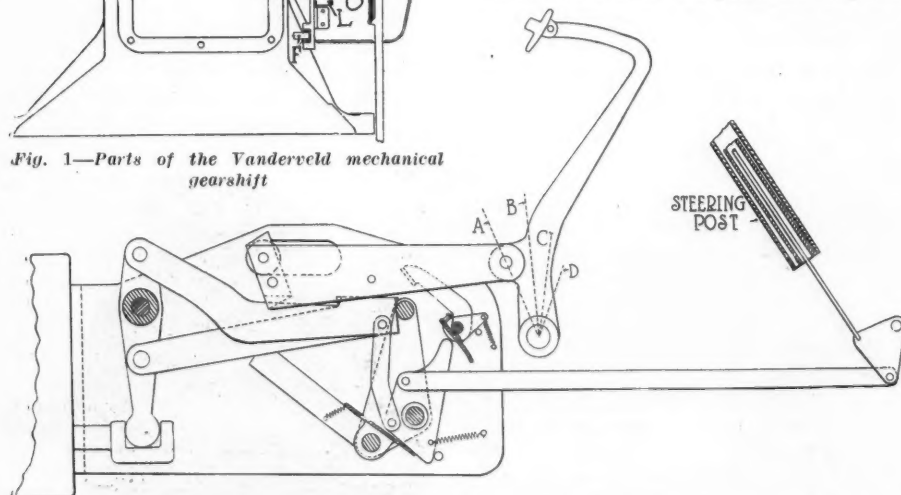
The four clutch positions in the Vanderveld system. When at A the clutch is engaged, at B disengaged, at C the gears are in neutral, and at D the gears are in mesh.
